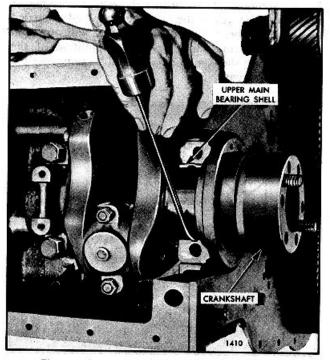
Removing Upper Rear Main Bearing Shell 3. Remove one main bearing cap at a time (Fig. 2) and inspect the bearing shells as outlined under *Inspection*. Reinstall each bearing shell and bearing cap before removing another bearing cap:
